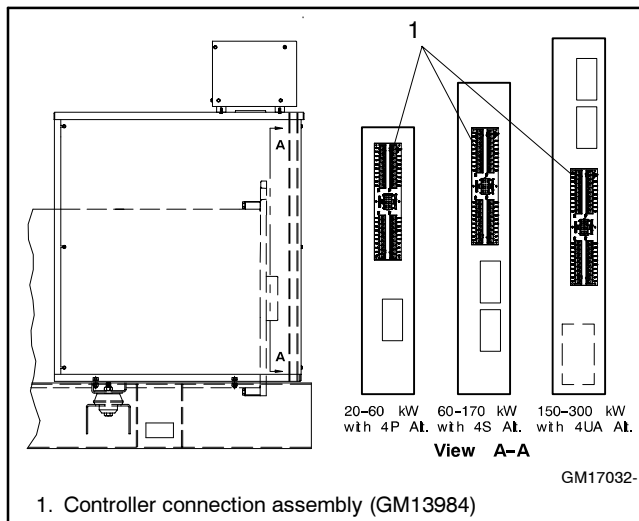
Controller Connection Assembly Mounting Locations in Junction Box (20-300 kW)
